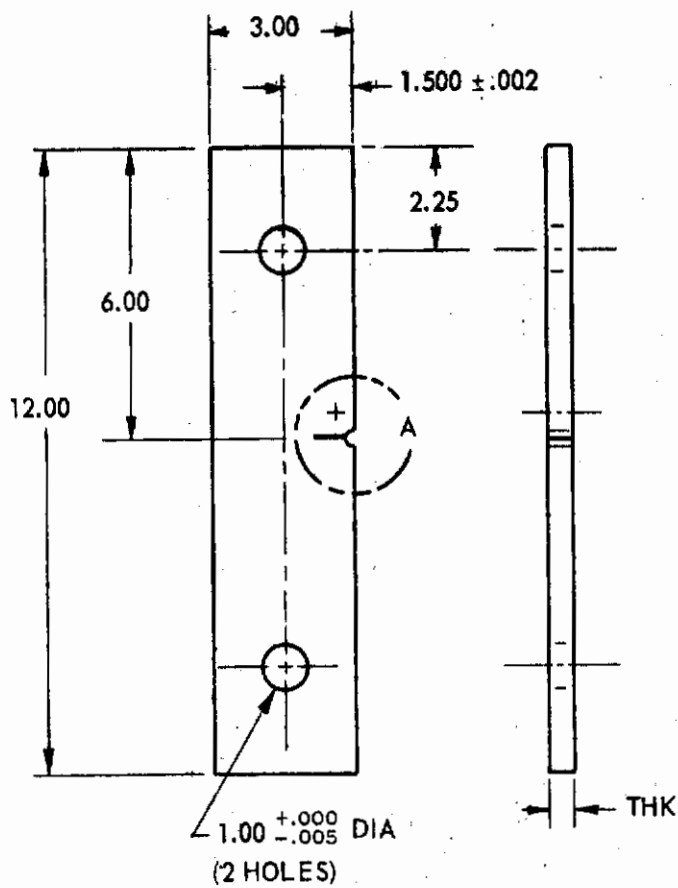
Single-Edge-Notch Specimen and Crack Opening Displacement Gage
